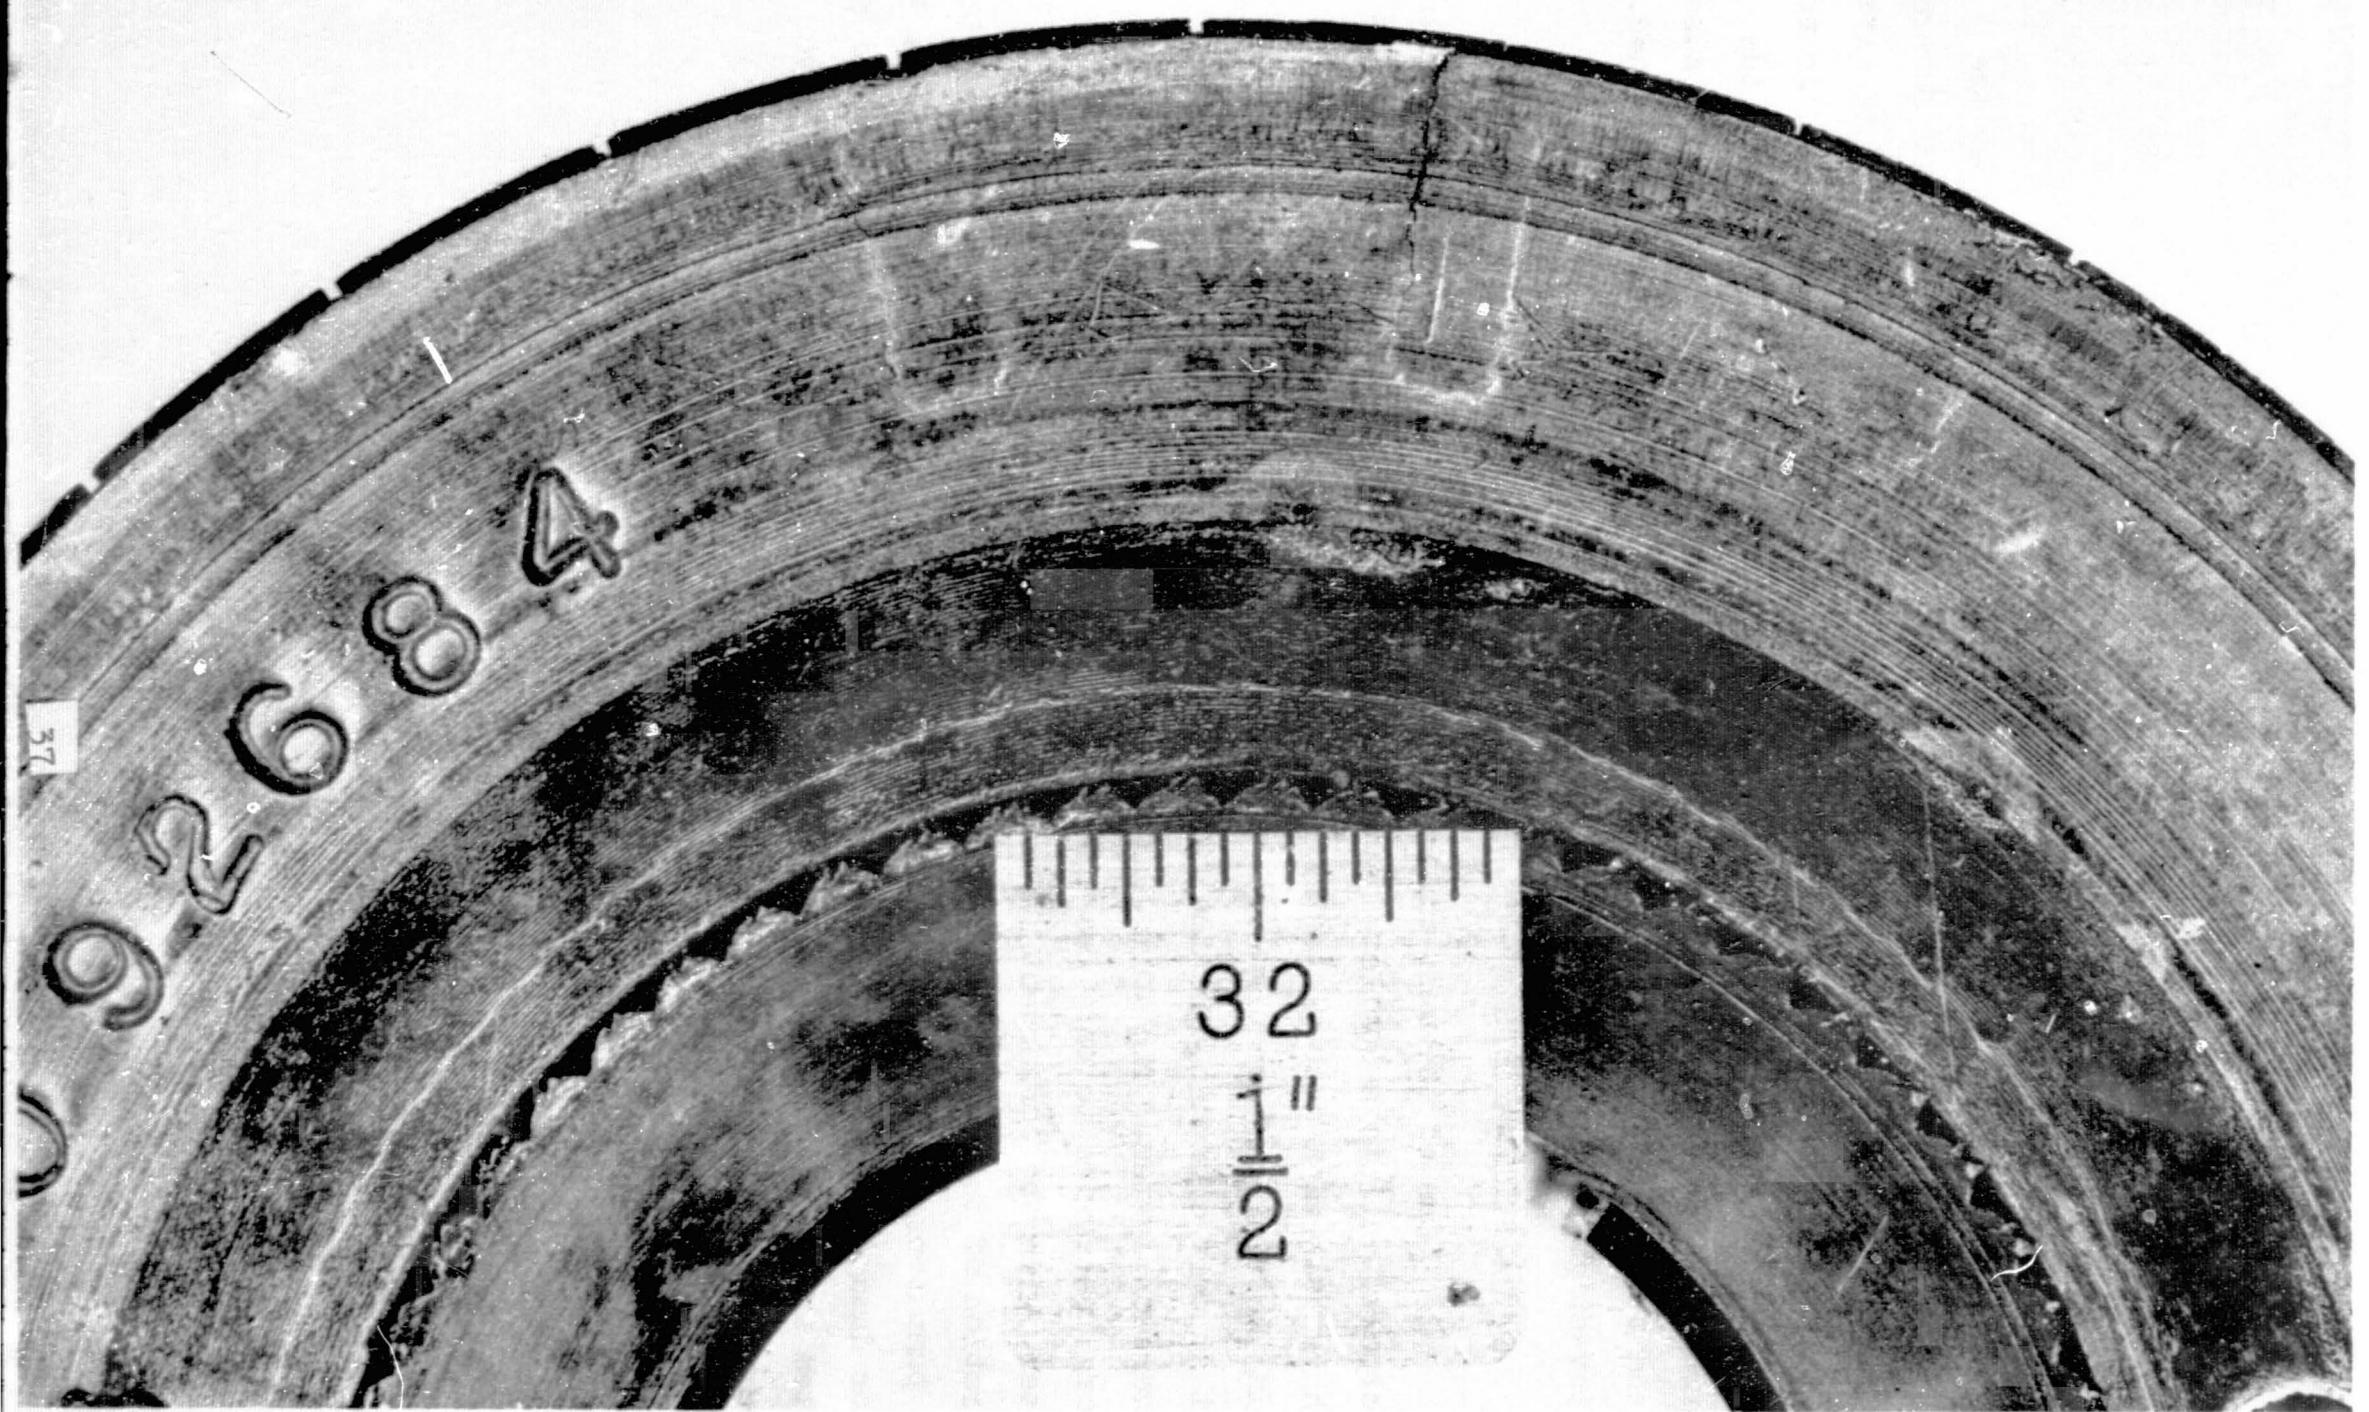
Motor End Ring Cracks - Inboard End After 12,227 Hours Operation and 109 Start Cycles
